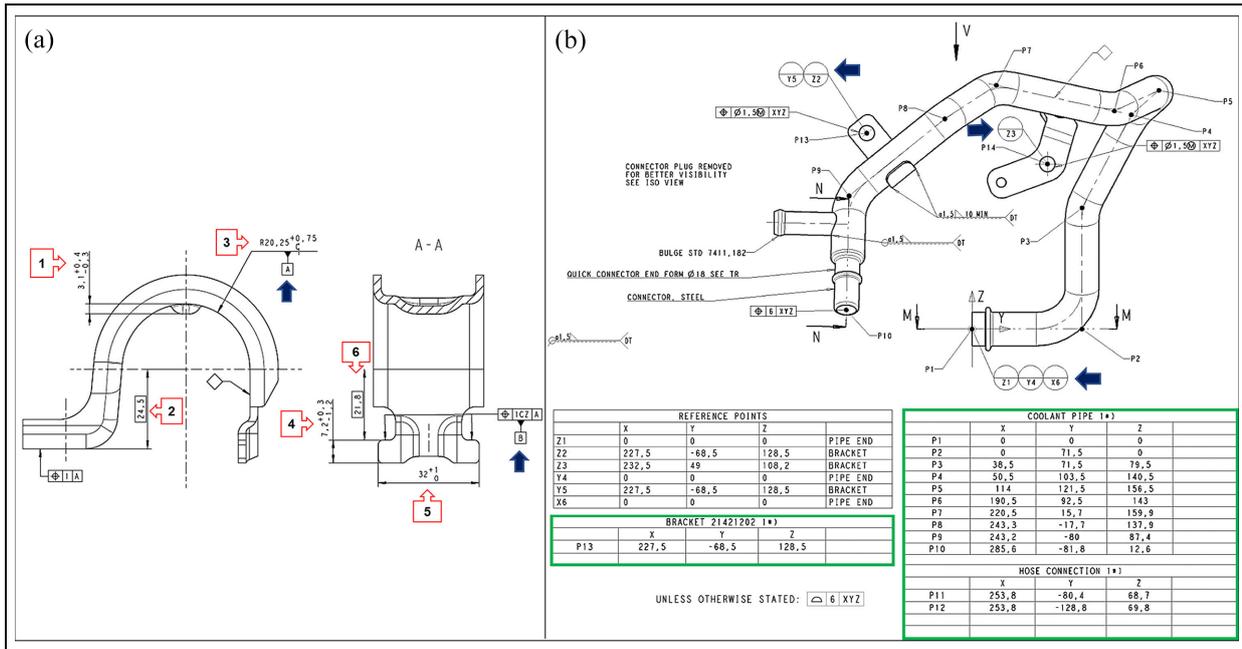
Parts technical drawing with indications of datum targets and tolerated dimensions in: (a) handcuffs and (b) cooling tube.
